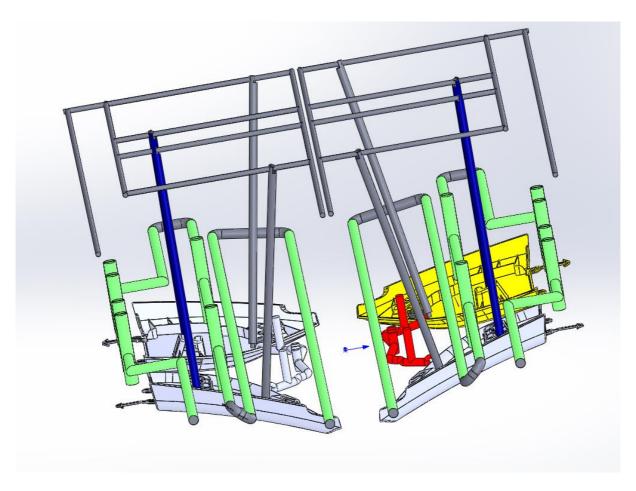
New Core side of the mold with the double rack system with cooling feature incorporated.
